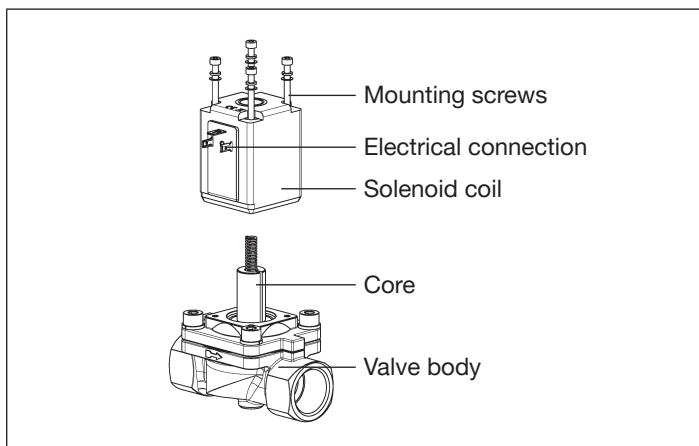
Solenoid valve type 0290 with solenoid coil type 0243
